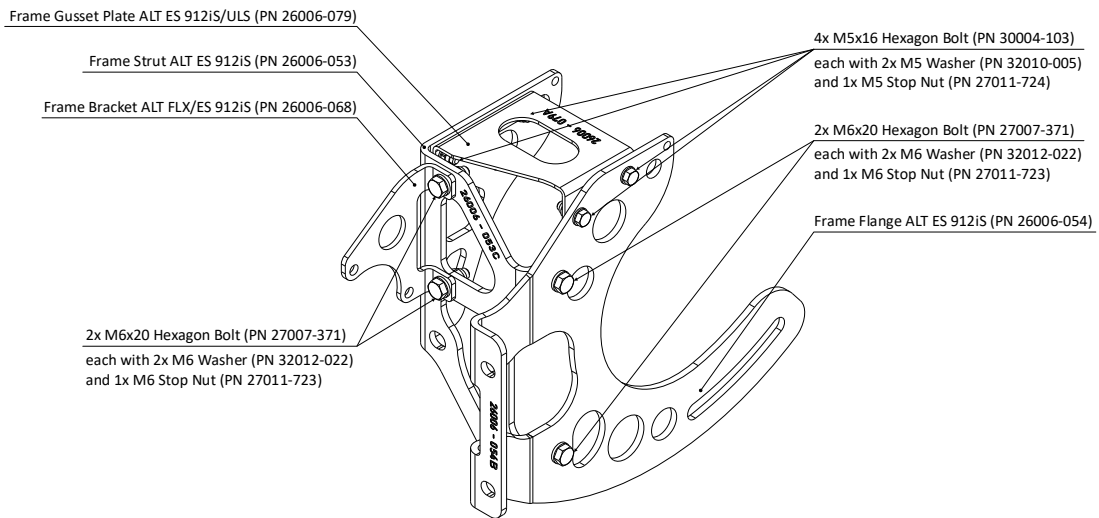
Isometric View Ext. Alternator Kit 70A Rotax 912iS Frames
